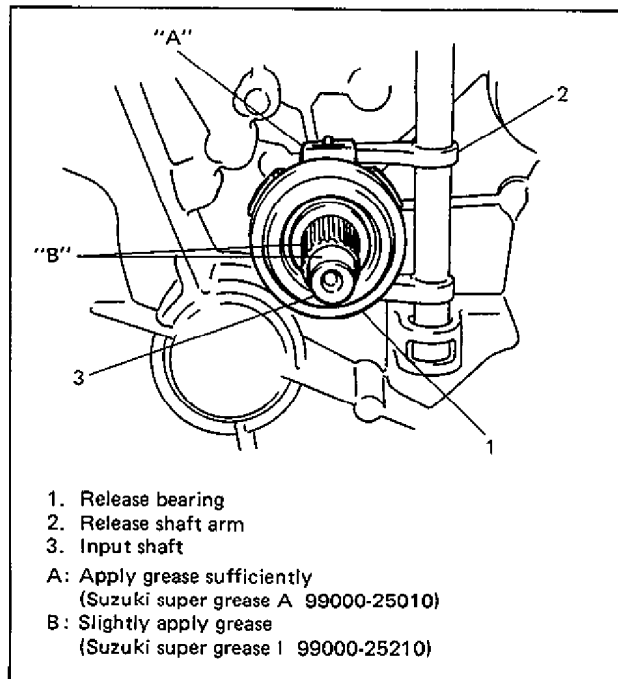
C1-11-6 Lubricating Release System and Input Shaft
